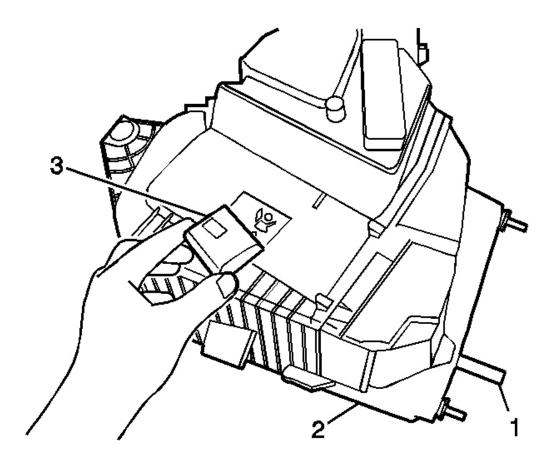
Removing/Installing Backing Plate Courtesy of GENERAL MOTORS CORP.
